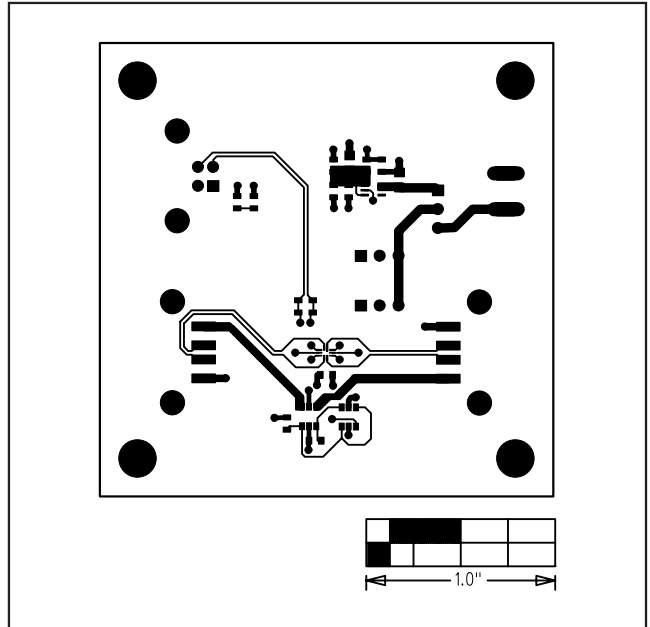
MAX4983E EV Kit PCB Layout—Component Side
